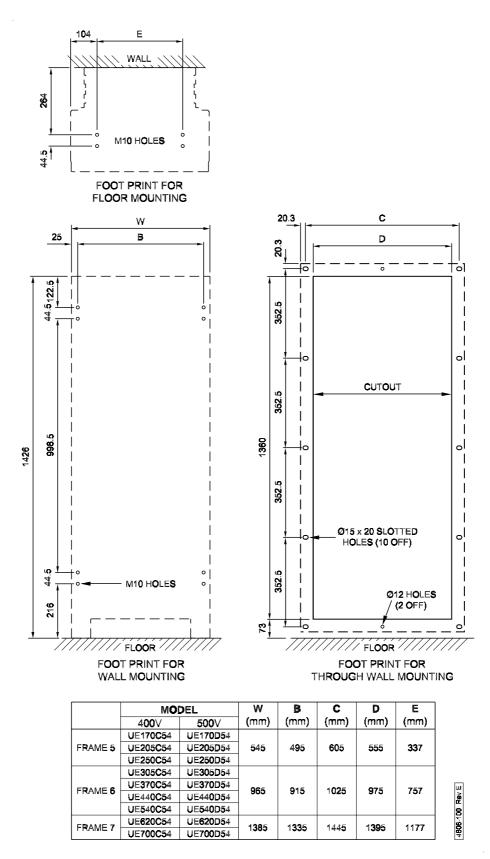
Ultradrive Elite Frames 5 to 7 Mounting Details
